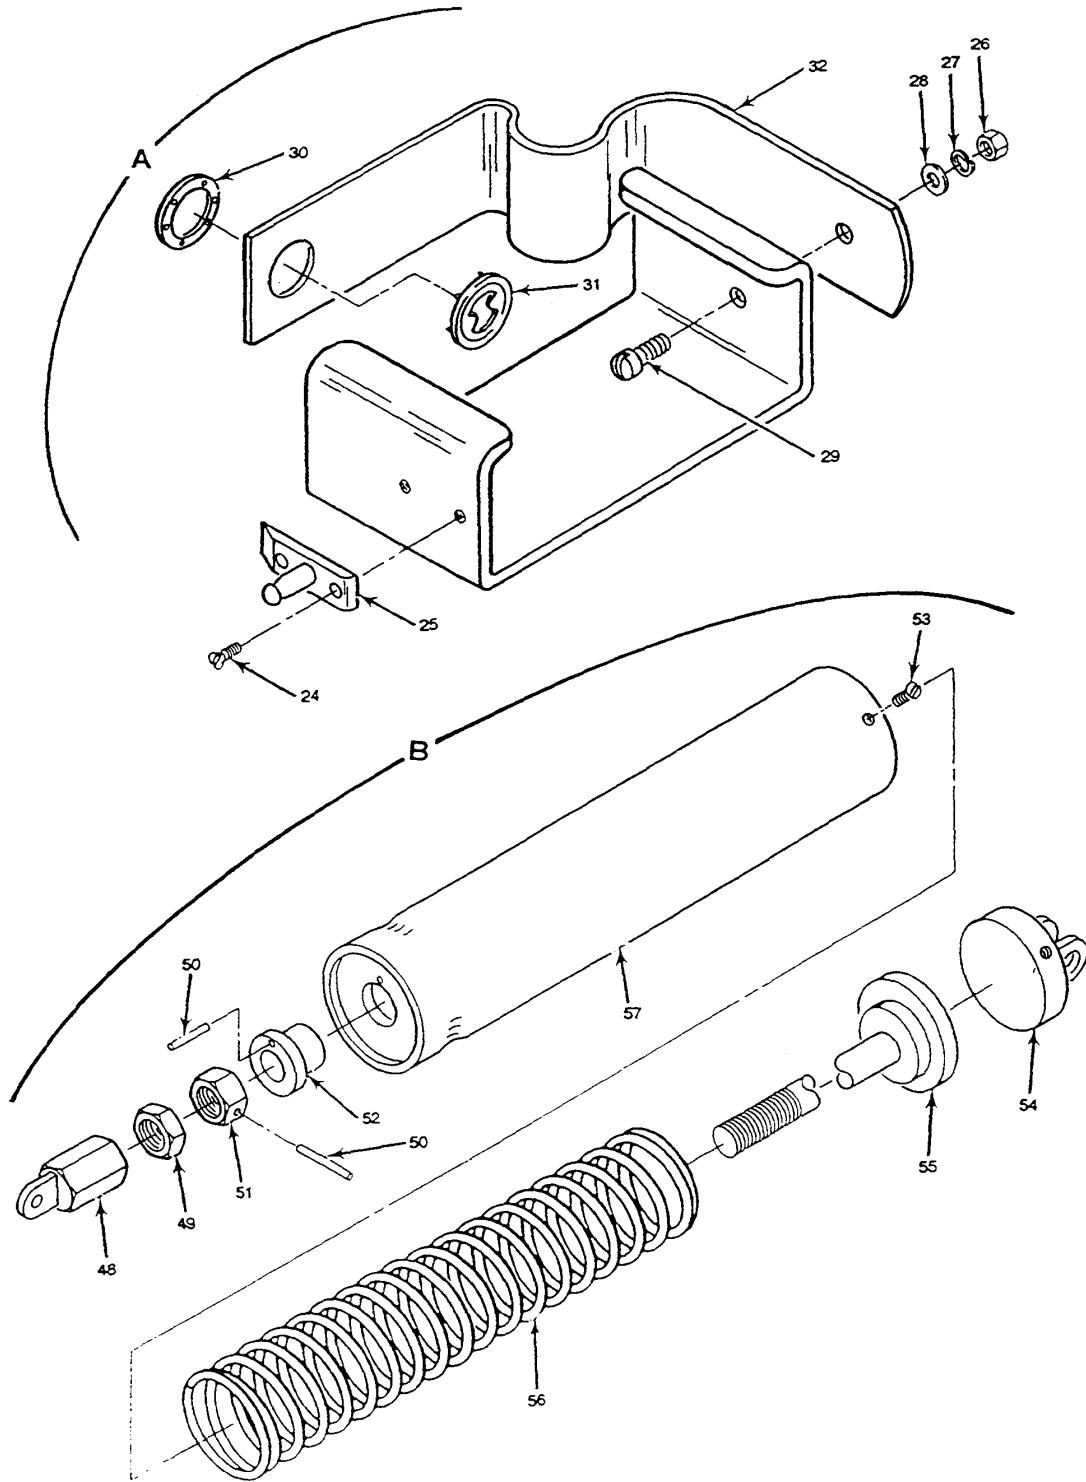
Trunk Assembly, Model CR-12B and CR-12B-P (Sheet 2 of 2)
